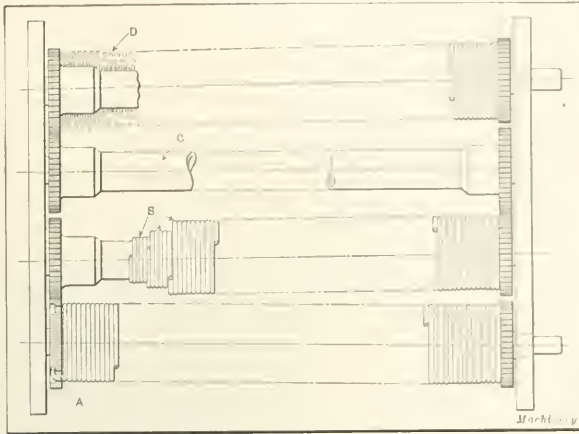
Construction of Spring Batteries and Arrangement of Geared Drive
